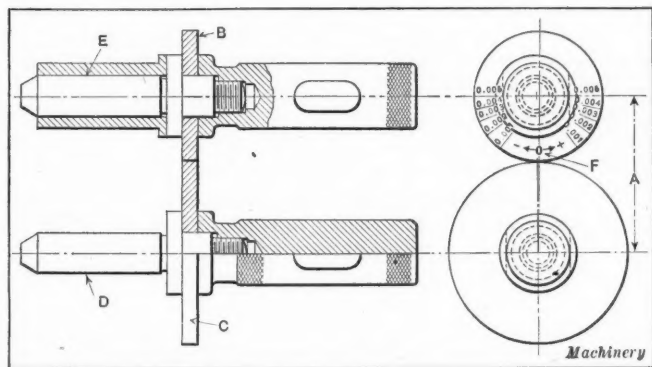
Special Plug Gage for gaging Gear Center Distances
